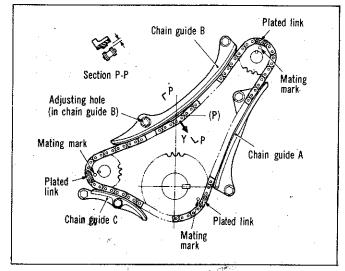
Counter-balance shaft chain alignment and adjustment (early type chain guide B)
